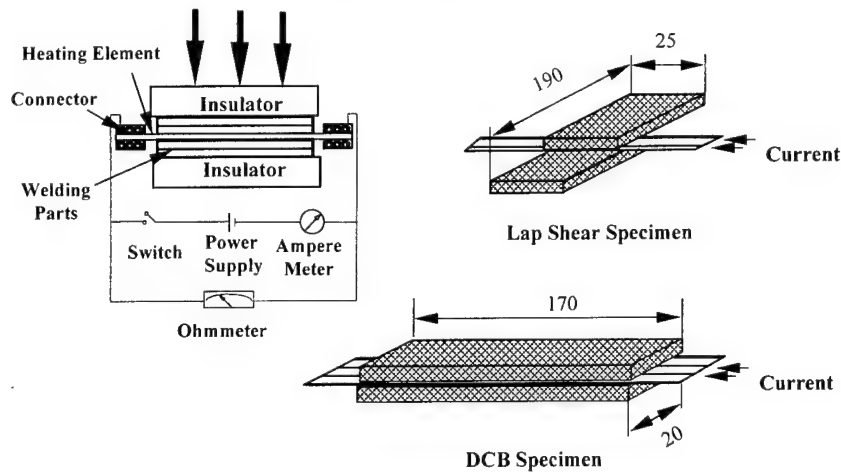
Schematic illustration of resistance welding set-up.
